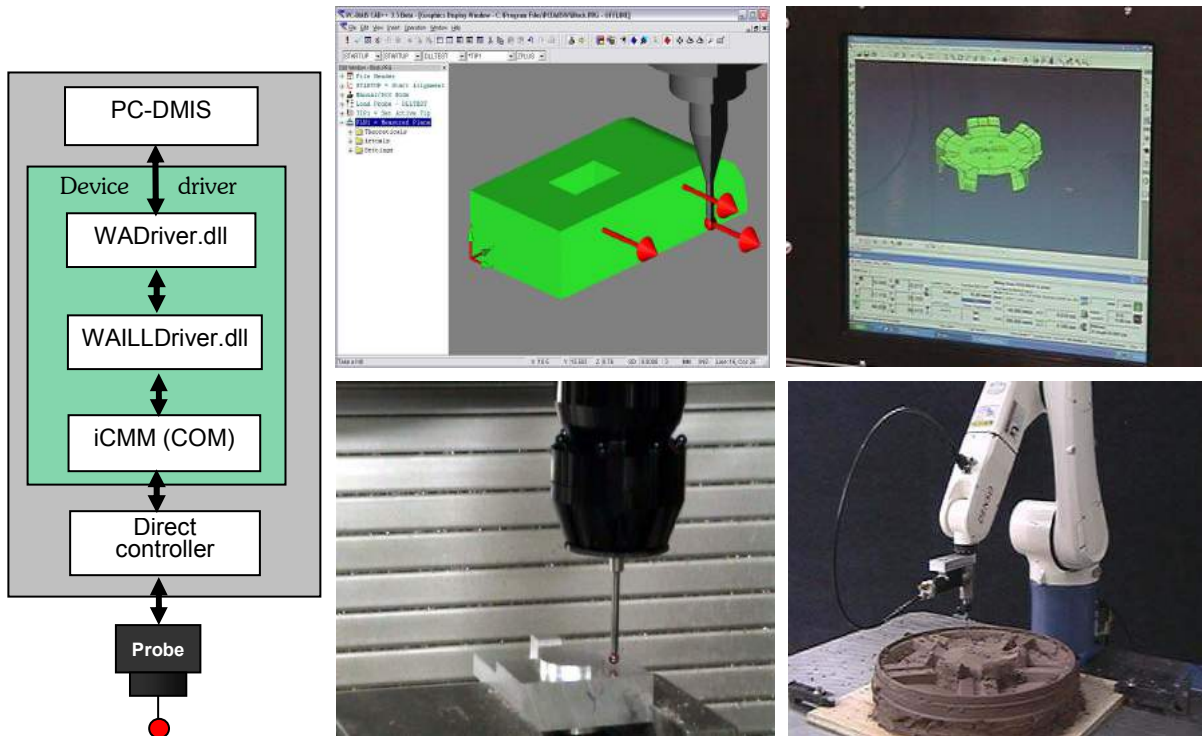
CMM device driver. Fig. 2: PC-DMIS (top) and part inspection. Fig. 3: TruPath™ Panel & Denso Robot.
